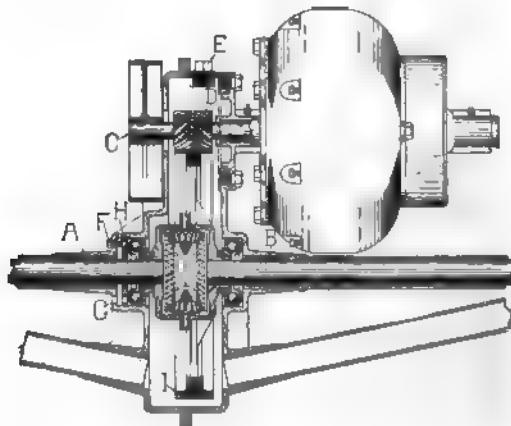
Plan Diagram of Single Motor Attached to Rear Axle Through "Herring-bone" Single Reducing Gears. A is the left-hand section of the divided rear axle; B, the right-hand section of the rear axle; C, the brake drum; D, the spiral pinion on the motor shaft driving the worm gear; E, on the differential; F, plug for greasing gears; G, set screw for locking ball race; H, slot for wrench to adjust threaded ring; I, against ball bearings.
